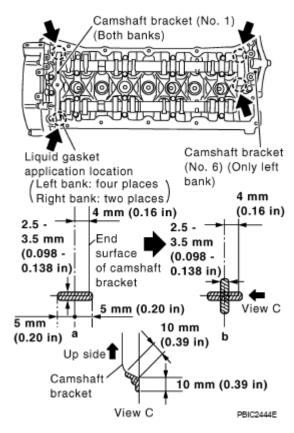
Locating Camshaft Bracket Sealant Area Courtesy of NISSAN MOTOR CO., U.S.A.
